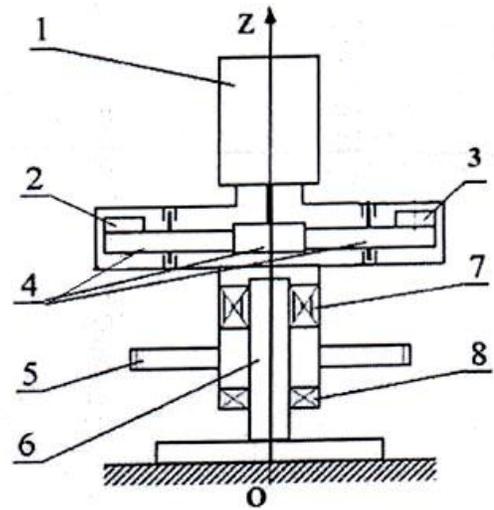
Centrifugal power amplifier: 1 - electric motor; 2 and 3 - unbalanced weights; 4 - gears, 5 - gear wheel; 6 - stationary axle; 7 - overrunning clutch, 8 - bearing, r - rotation radius of centre of mass of unbalance.
